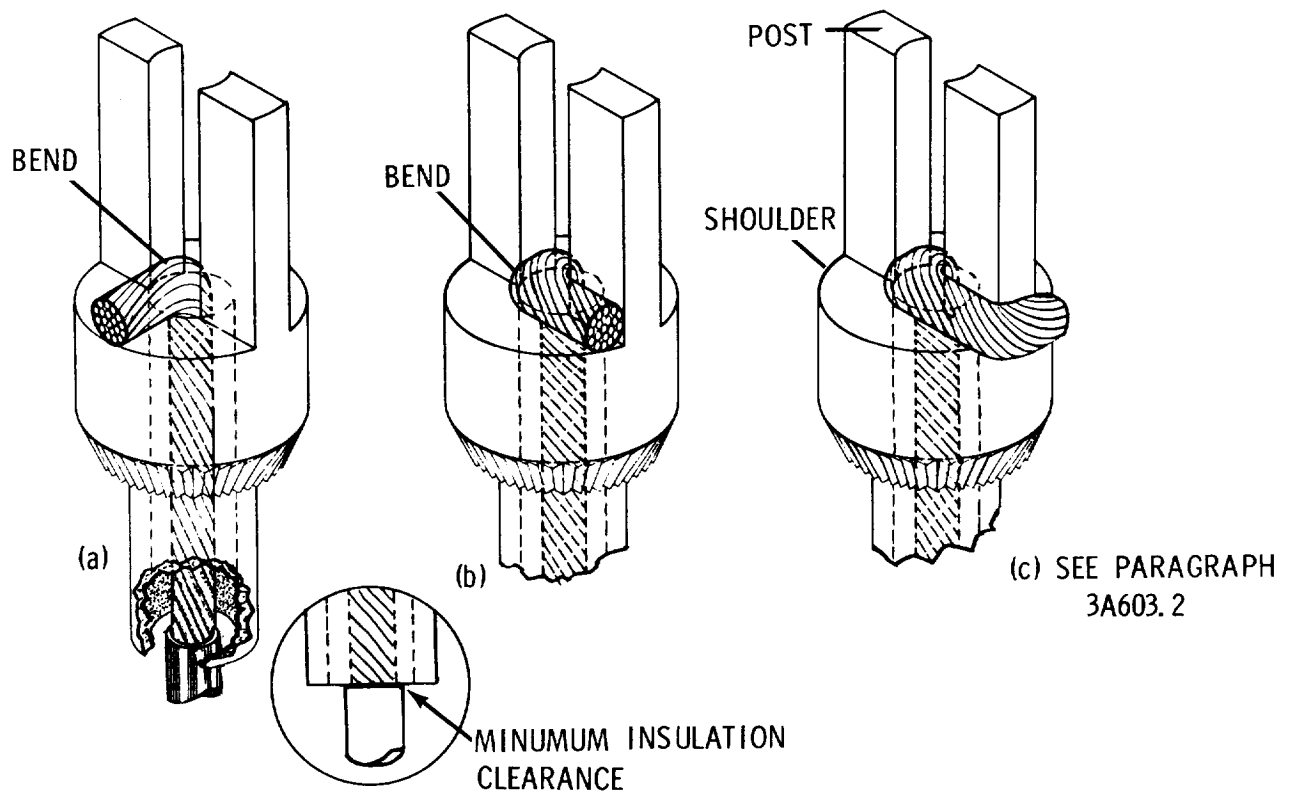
BOTTOM ROUTE CONNECTIONS TO BIFURCATED TERMINAL
